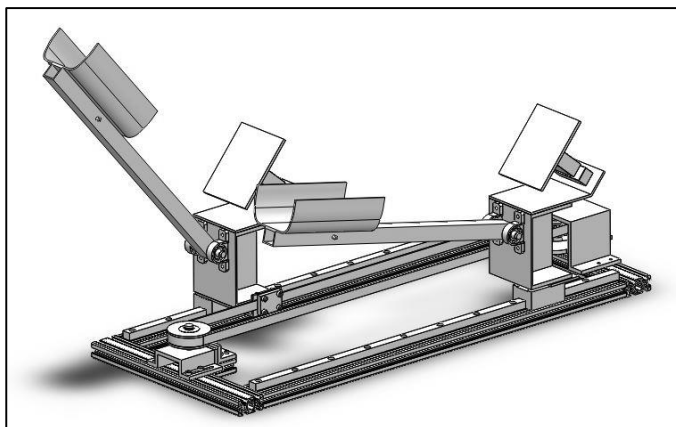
The CAD design lower limb stroke rehabilitation machine.
